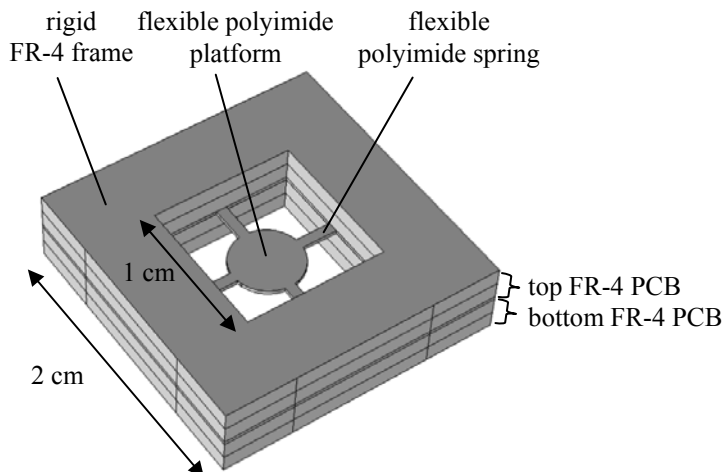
Schematic of harvester fabricated by rigid-flex PCB technology.
